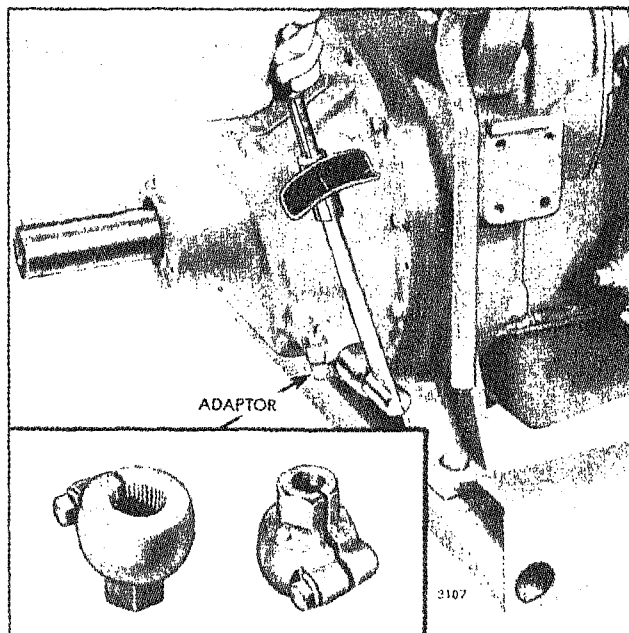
Checking Clutch Adjustment with a Torque Wrench and Adaptor
